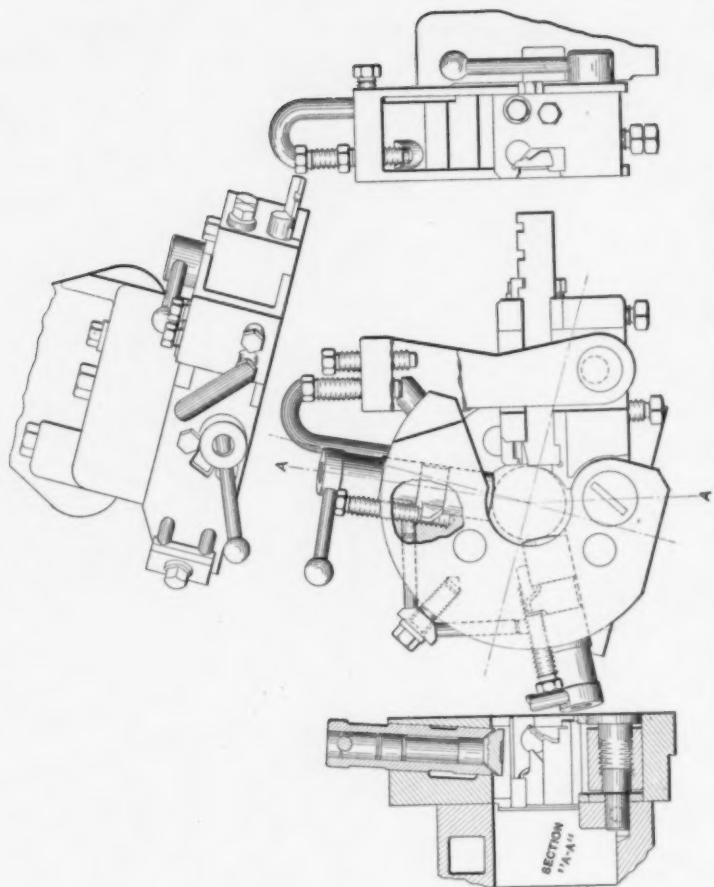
TURNING TOOL FOR FLAT TURRET LATHES
